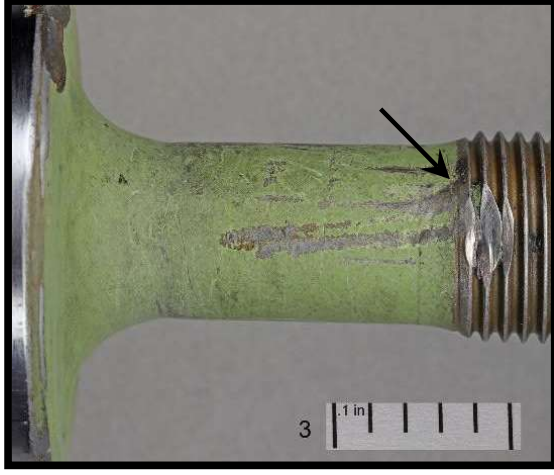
Detailed view of Tee Bolt shank-3 o'clock position.
